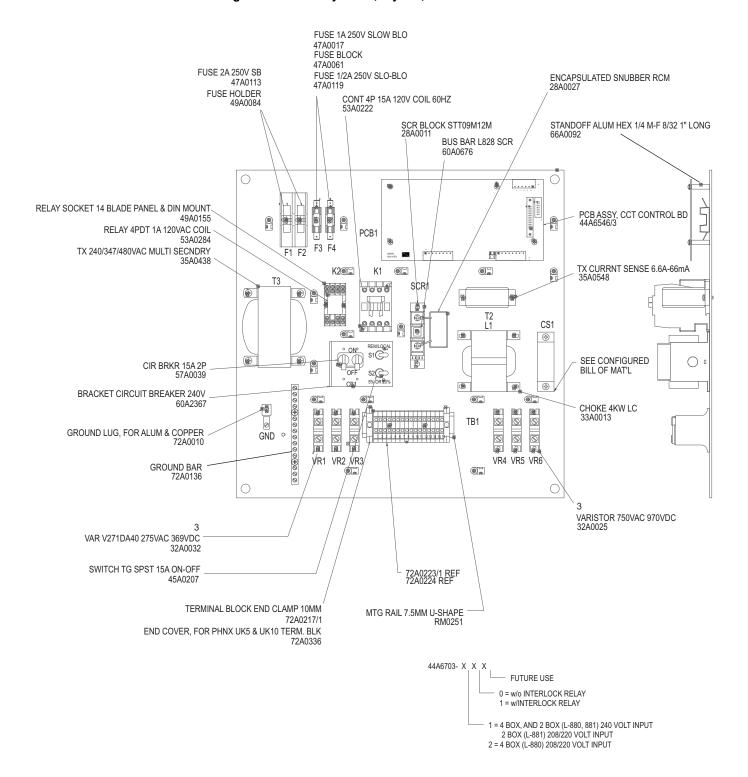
Primary Enclosure Assembly, Style A, 44A6752 XXX
